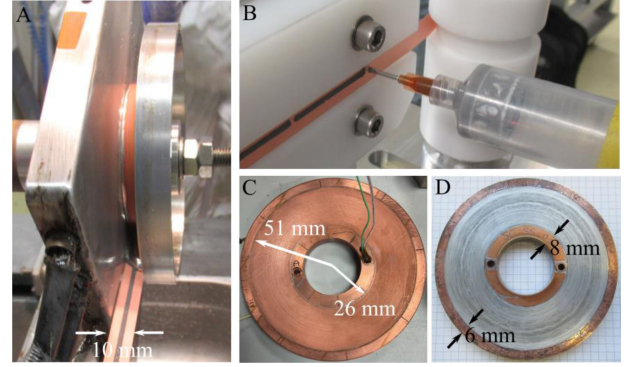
Pictures of (A) winding the soldered-coil, (B) applying solder paste to the tape, (C) dry-wound and (D) soldered coil.
